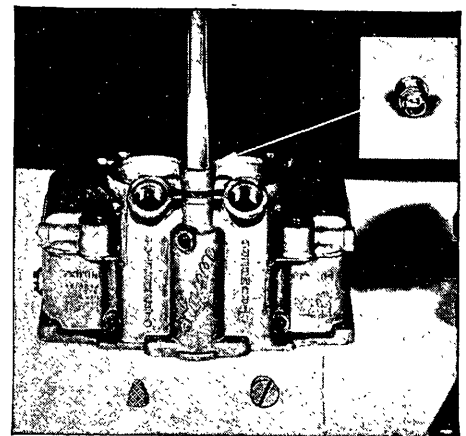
Remove body screws and disassemble main body from throttle body. Scrap gasket
